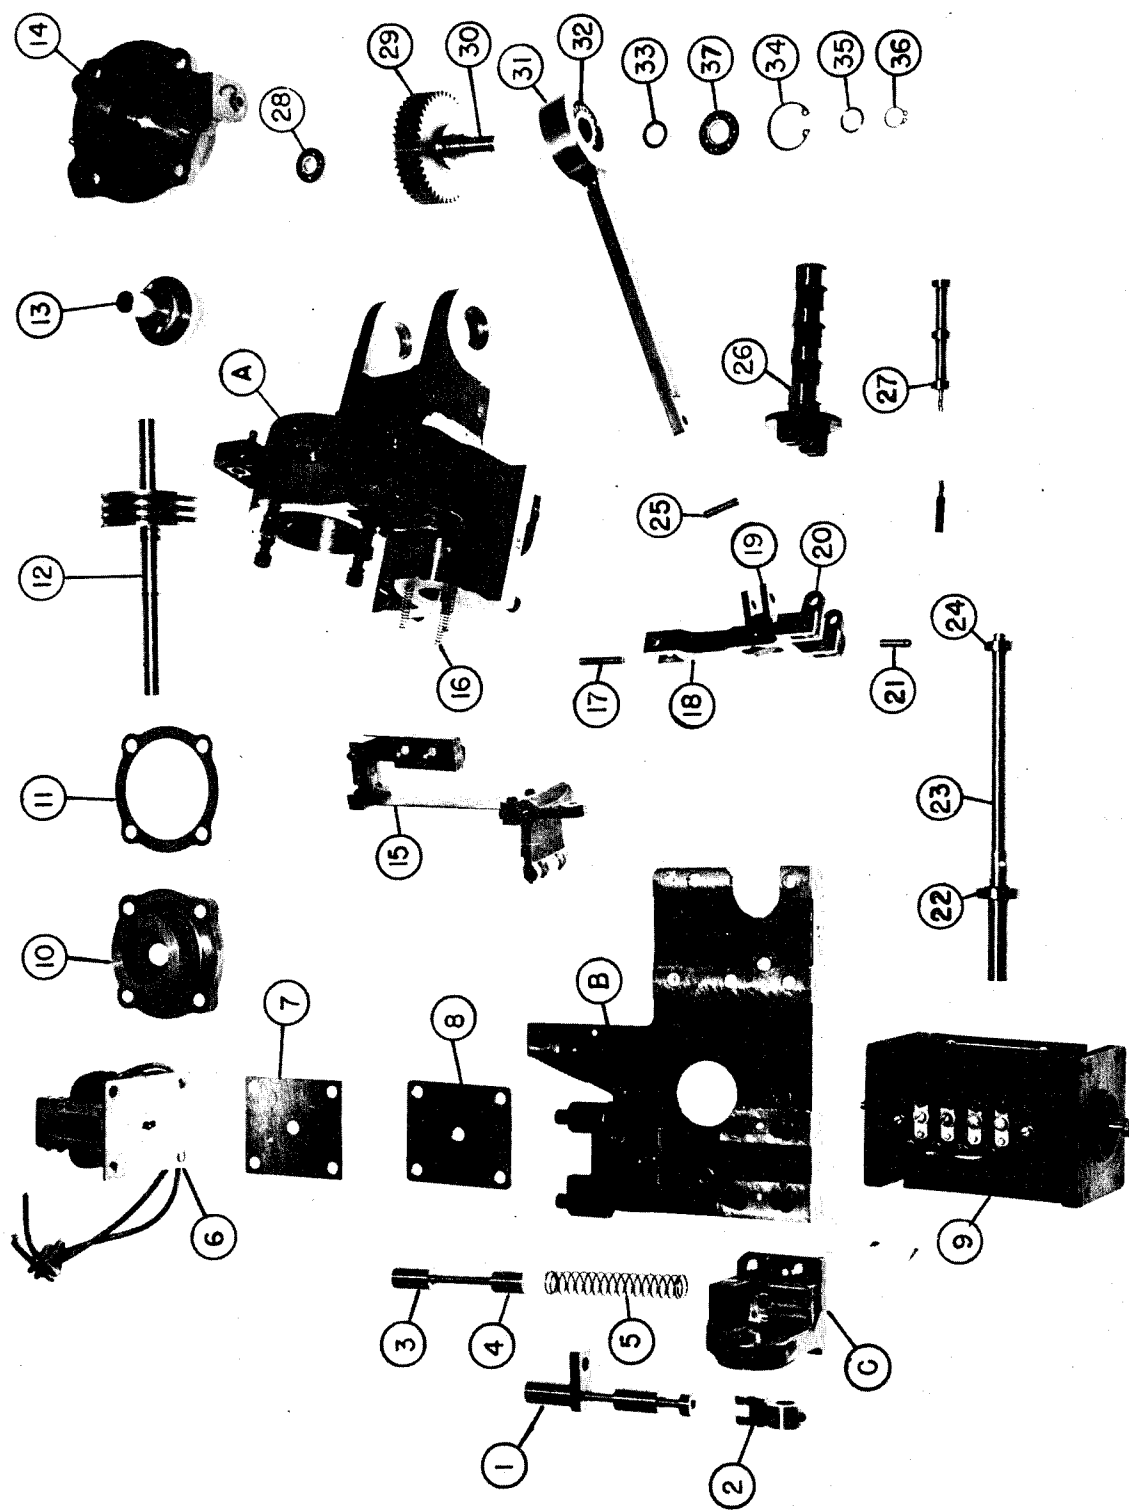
STROKE CONTROL MECHANISM - DISASSEMBLED
